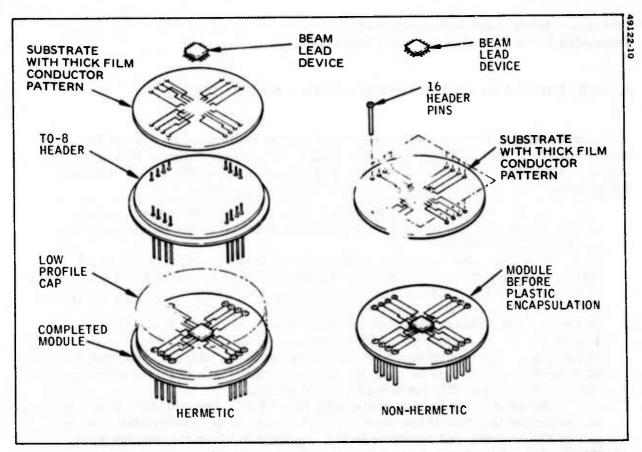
Exploded View of Package Construction. The hermetic devices were cap welded, while one of the non-hermetic devices was conformally coated and the other group molded.
